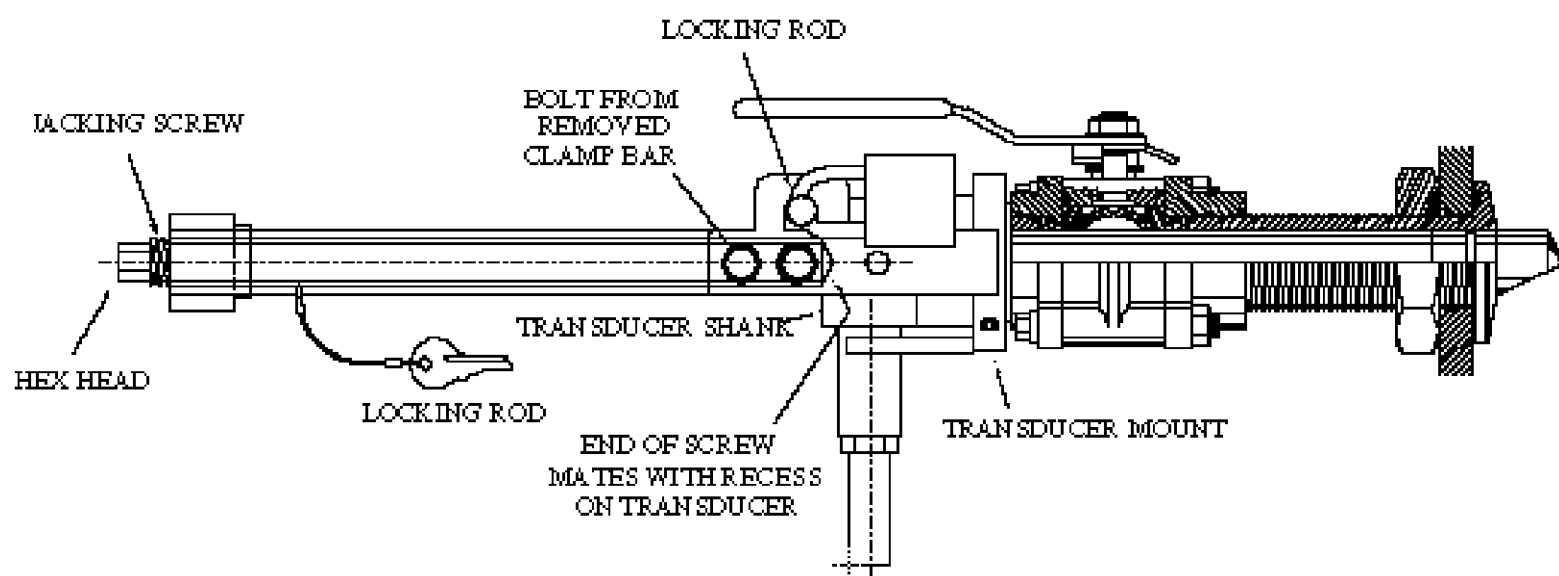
7600 Transducer Assembly with Extraction Tool Installed
